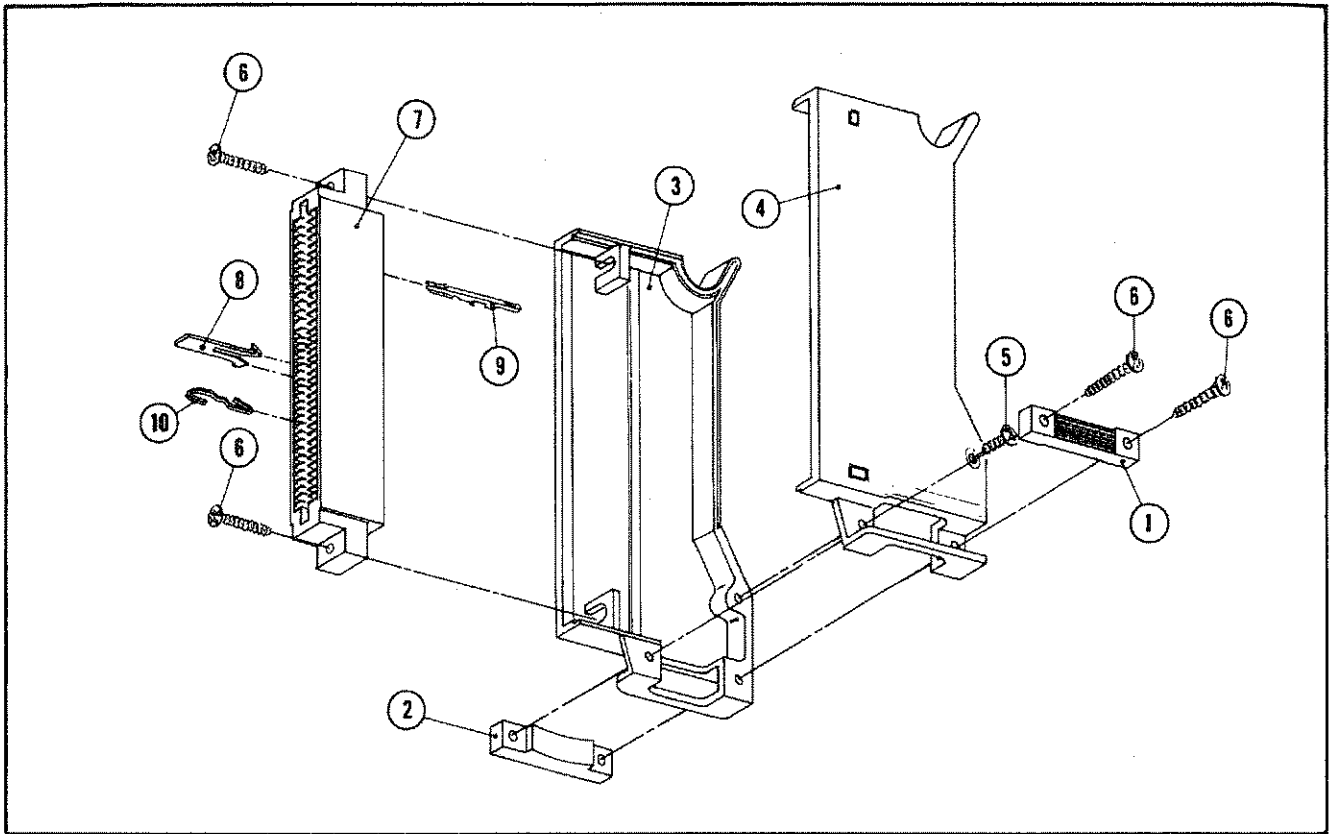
Connector Assembly, (HP, P/N 50600-28069 Exploded View
